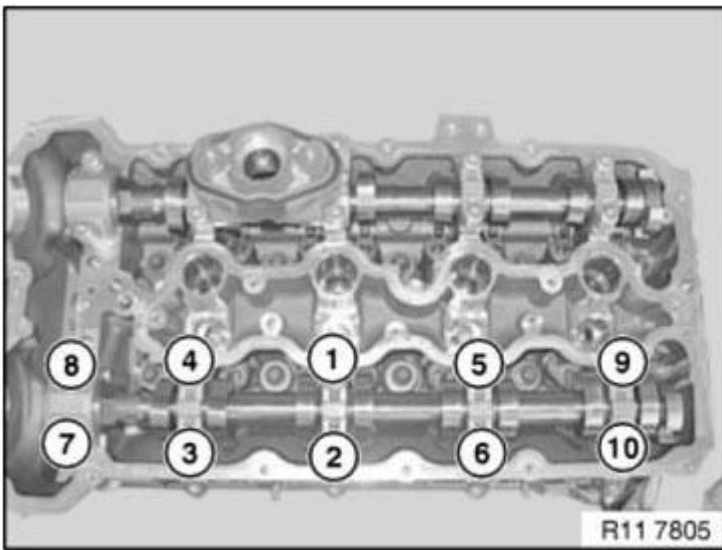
Identifying Camshaft Bearings Bolts Releasing Sequence
